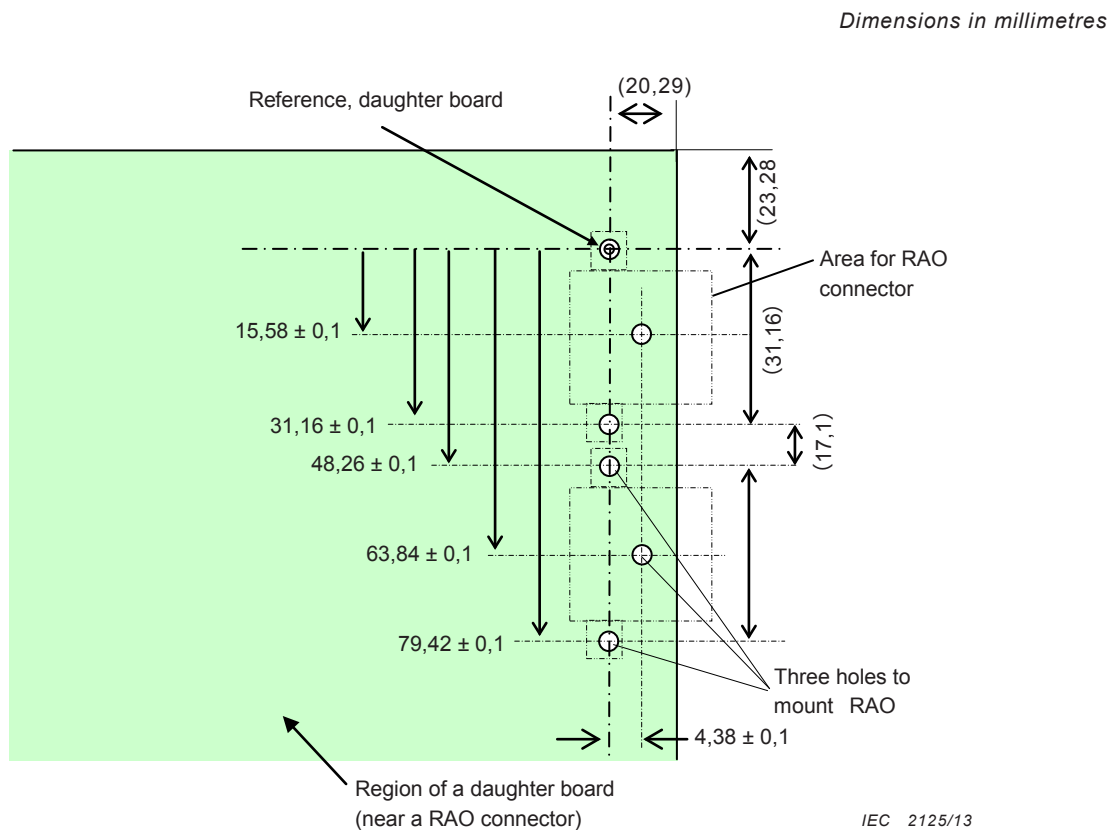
Hole positions to mount a RAO connector to a daughter board
